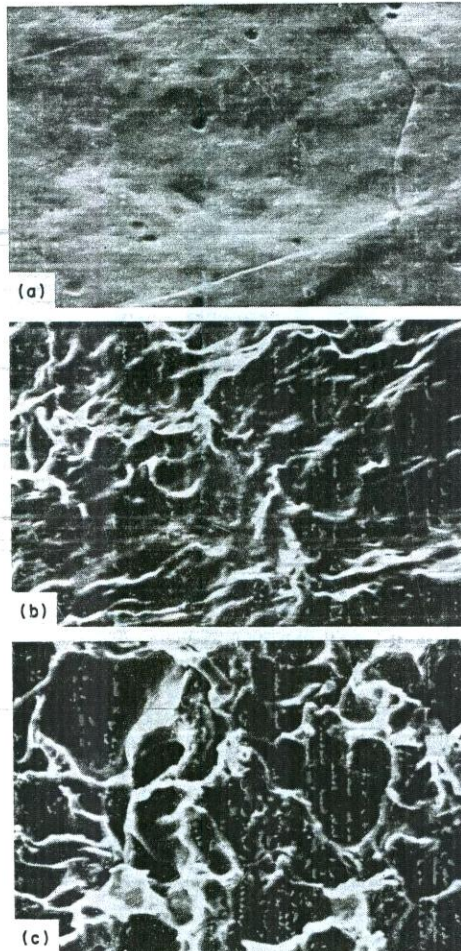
Pitted surface of a stainless steel pump component damaged by exposure to cavitating mercury
